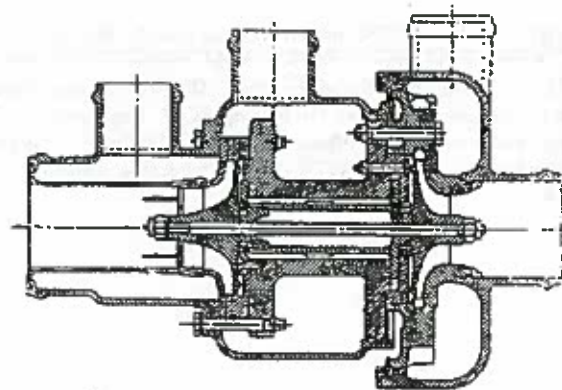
Cessna-550 Foil Bearing Air Cycle Machine
